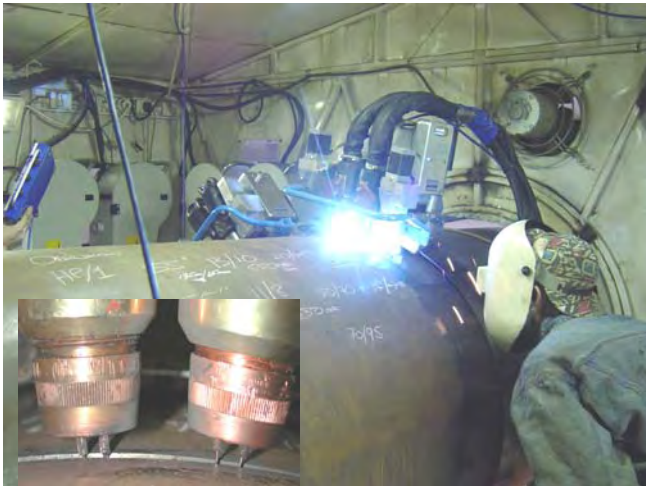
Arrangement of CAPS welding torches and system mounted on RMS welding systems mechanised welding bug.
